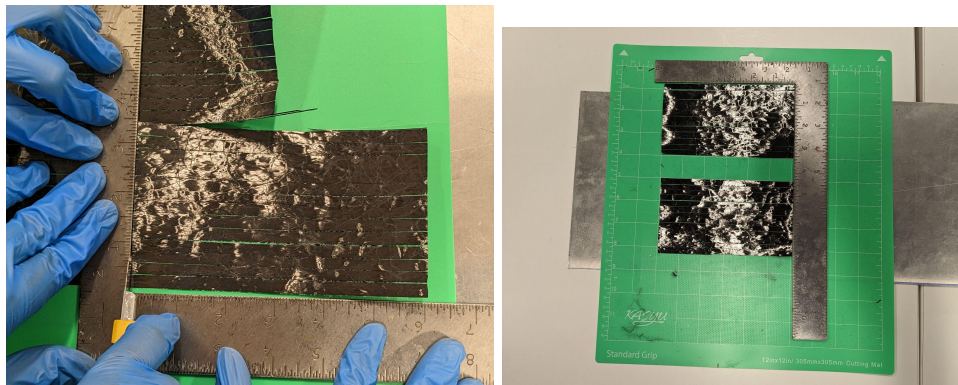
& 3: Cutting of Unidirectional Carbon fiber to the required dimensions
